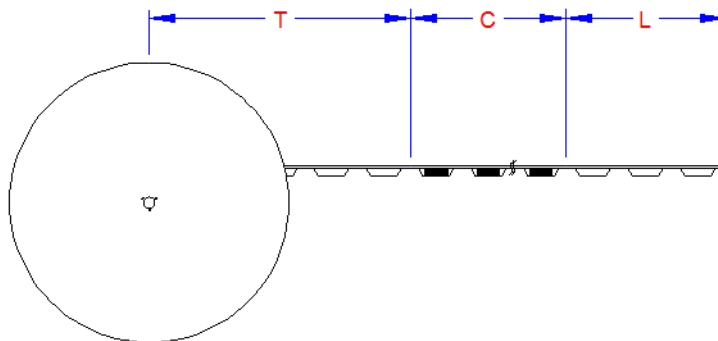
Reel Dimensions for 12mm Carrier Tape
